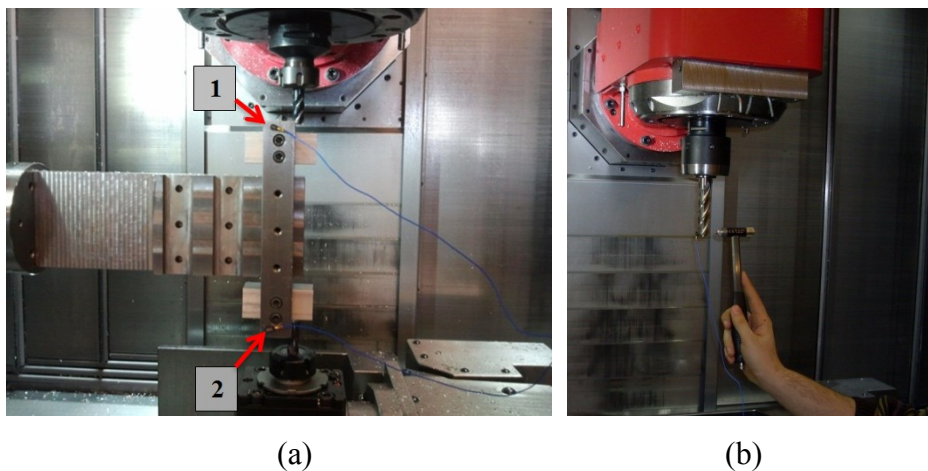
Modal testing of (a) workpiece and (b) tools.
